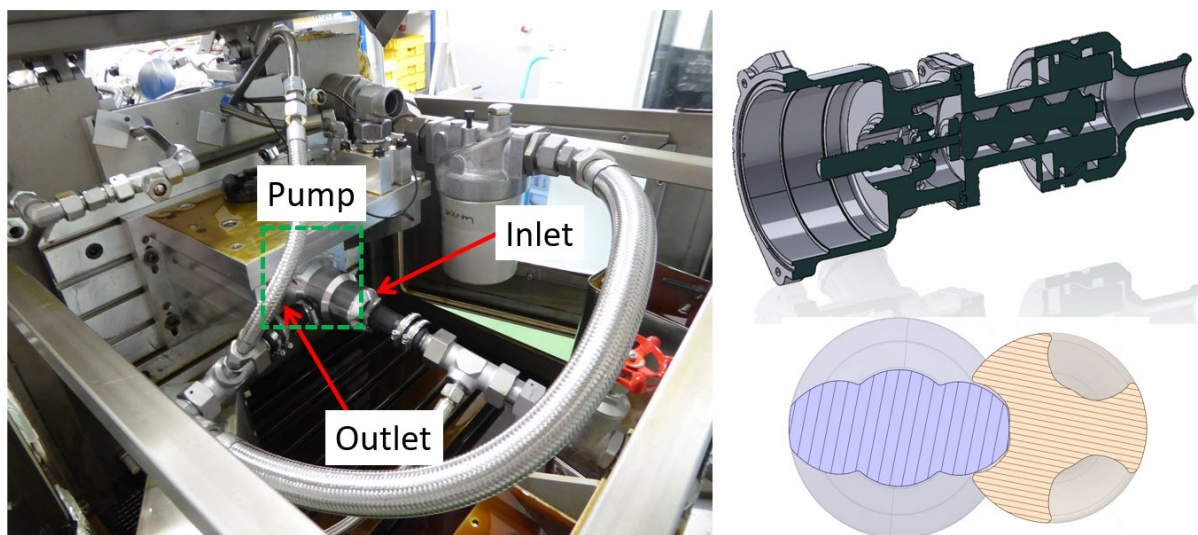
Test setup, pump, and rotor cross-section of the 2-3 screw pump
